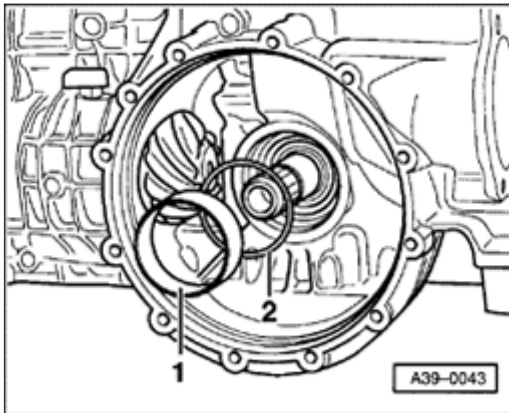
Identifying Tapered Roller Bearing Outer Race For Differential And Shim
